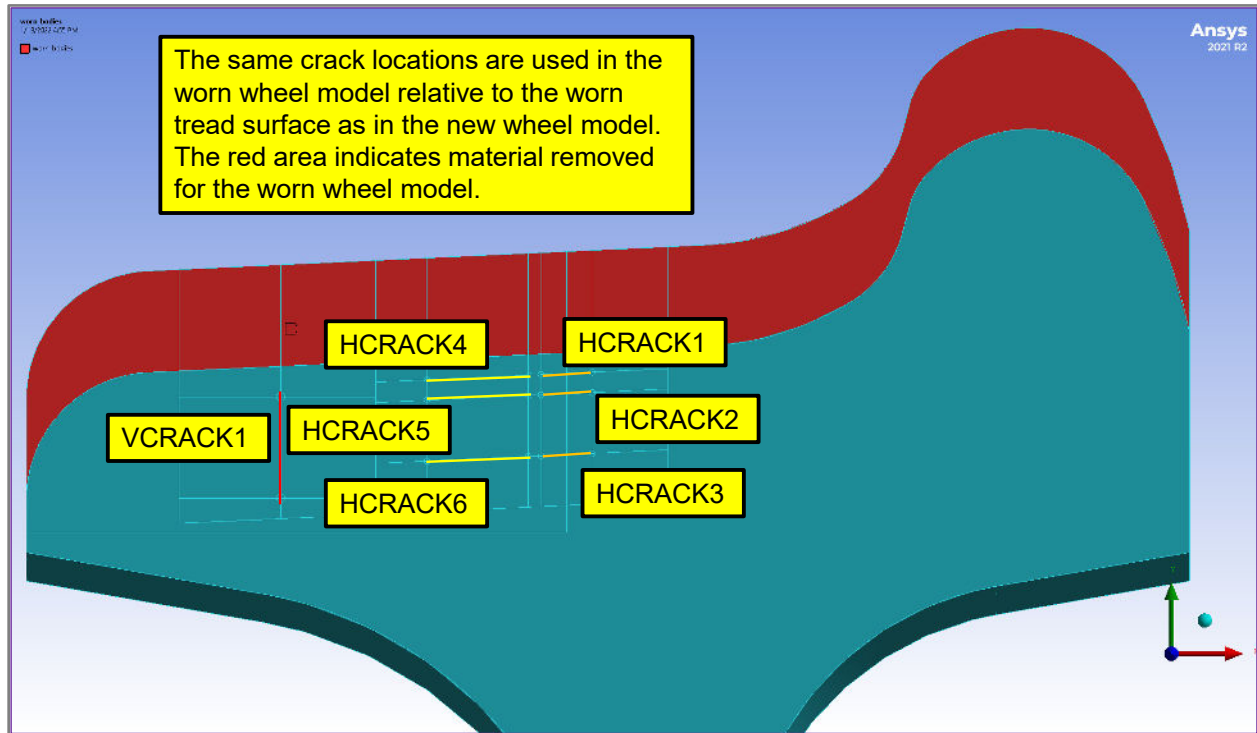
Section View of Embedded Cracks: 1 Inch Rim Thickness
